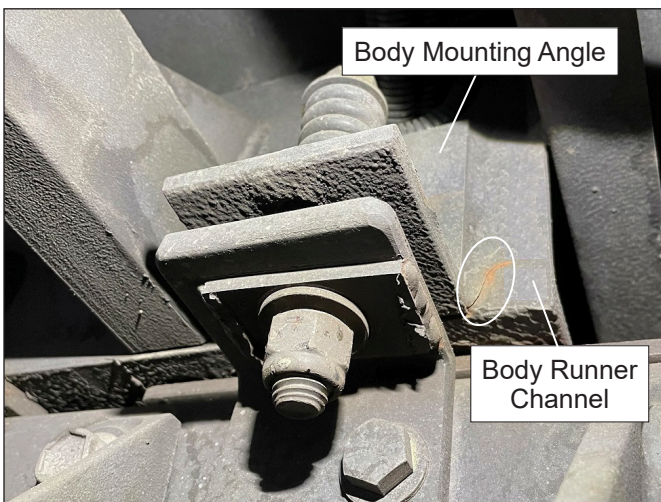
Example of Cracking in Body Mounting Angle Weld
